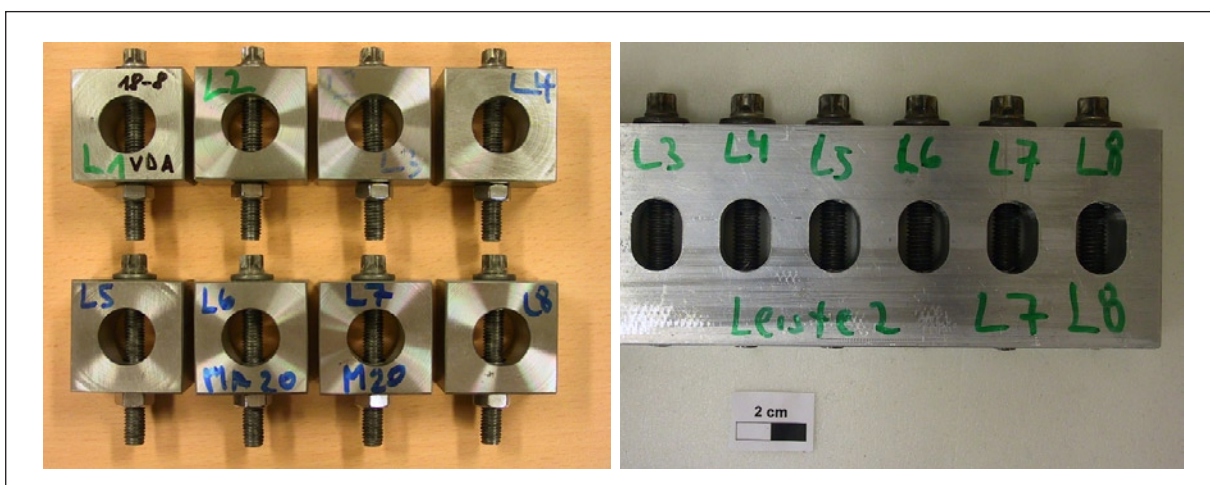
Bolted joints for stress crack corrosion and galvanic corrosion testing
